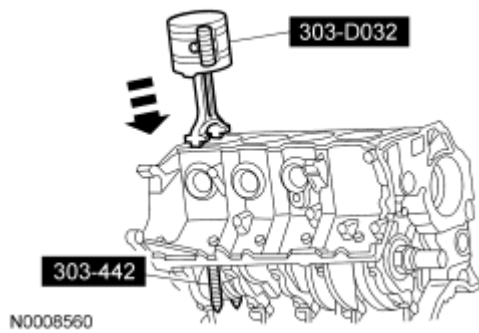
Using Special Tools To Install Piston And Connecting Rod Assembly
